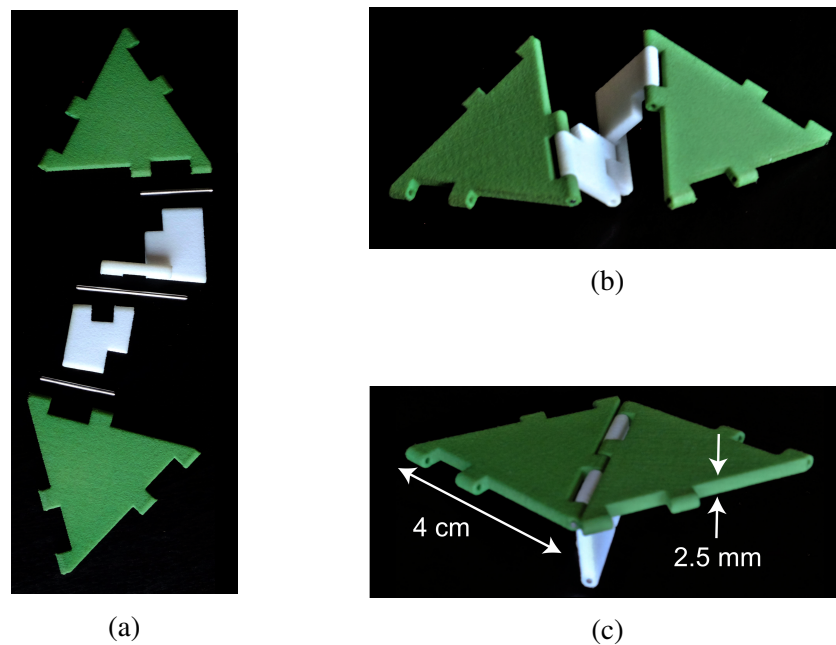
Hinge design concept demonstrated on two tiles connected by a sub-fold. (a) Exploded view of the 3D printed plates and pin hinges. (b) A configuration with the sub-fold partially open. (c) A configuration with the sub-fold closed.
